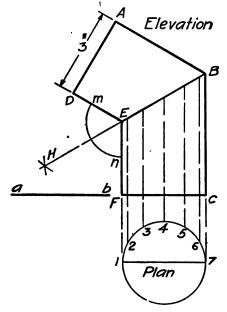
Elevation and Plan of Two-Pieced Conductor Elbow.
